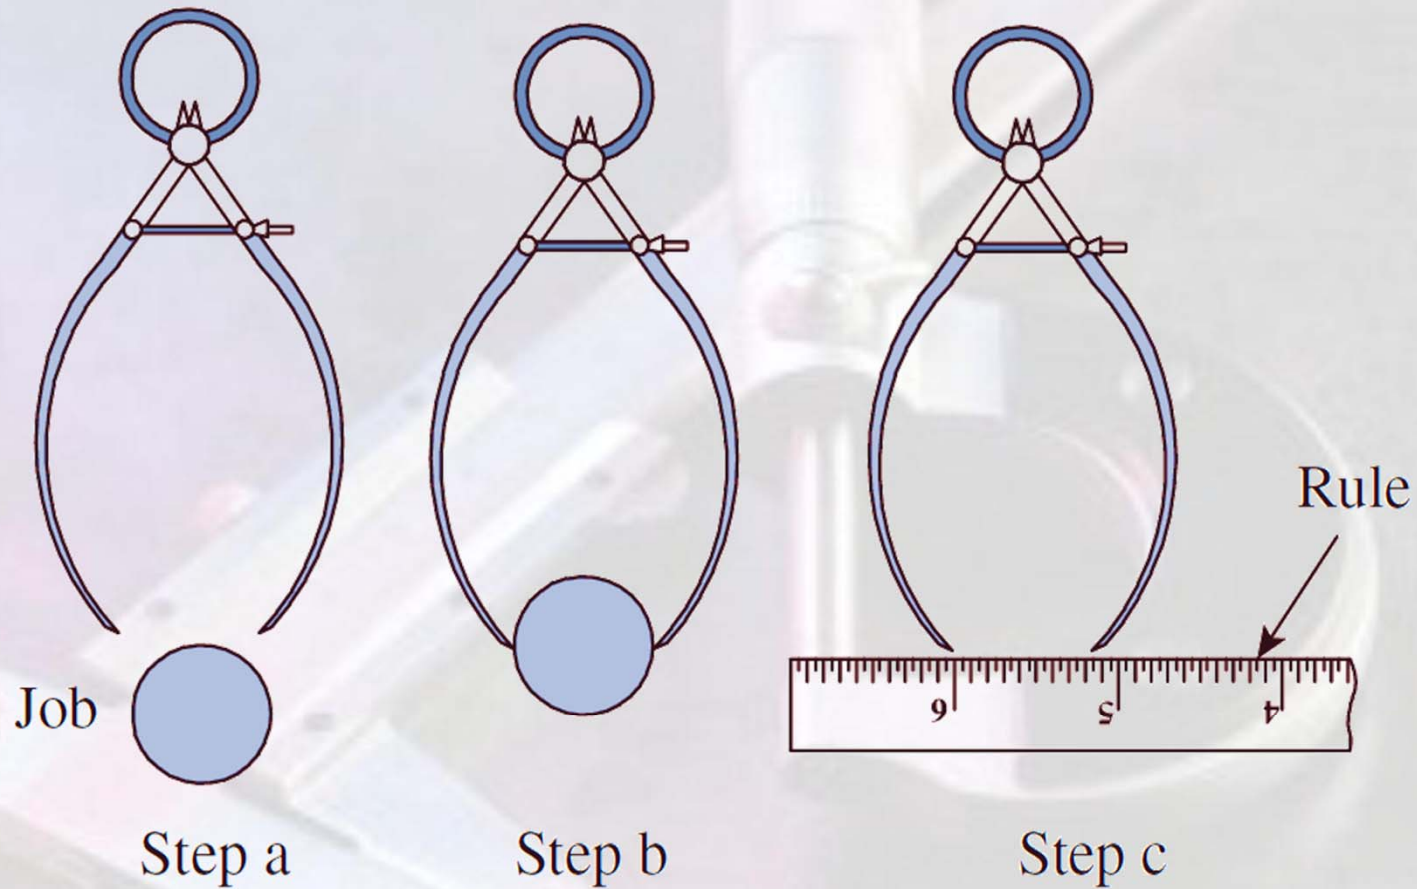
Calliper being used to transfer a dimension from a job to a rule
